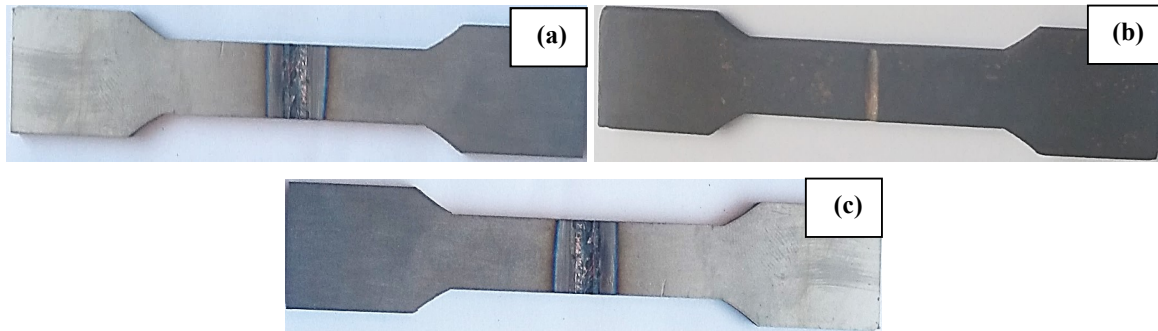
Tensile test samples of robotic laser welded joint, (a) and (b) underfill formation in non-heat treated and heat treated samples, (c) full penetration in welded sample
